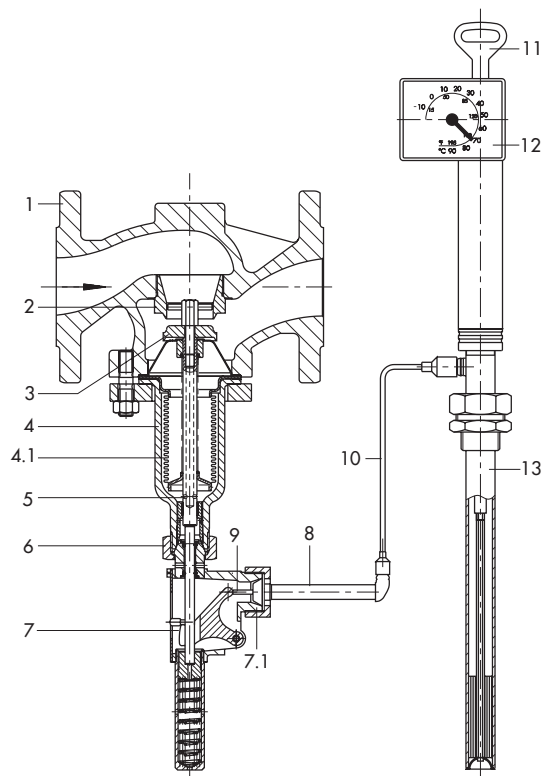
· Type 4u Temperature Regulator with Type 2114 Valve, reversing device and Type 2231 Thermostat
